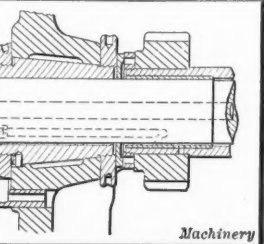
Lubrication of Loose Wheel through Separate Hole
